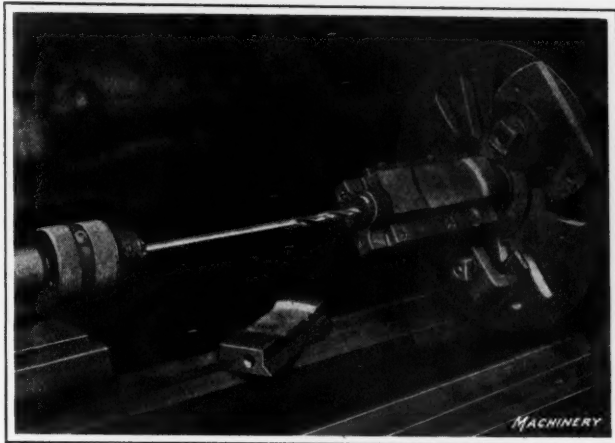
Fixture used for drilling the Feed-screw Hole in the Index-slide
